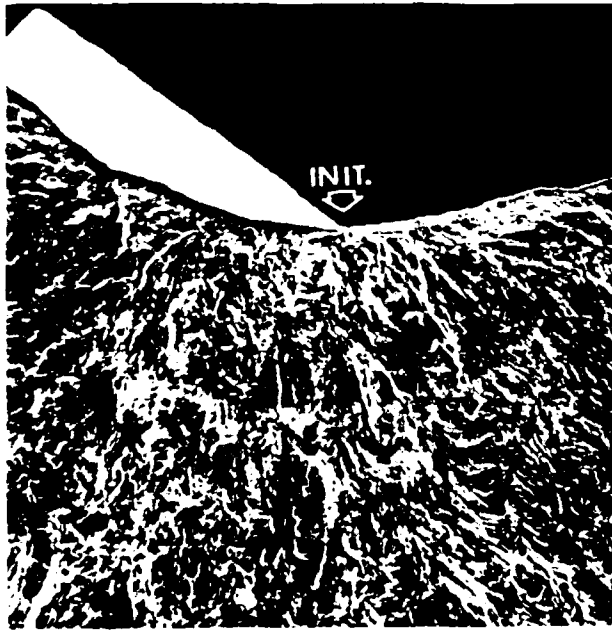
Torsional fatigue specimen cycled to failure--marage 250 steel.
